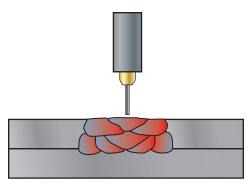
Complete the plug weld by making the necessary passes. It may be necessary to stop, chip, and clean the slag when making plug welds on thick metal sections.
